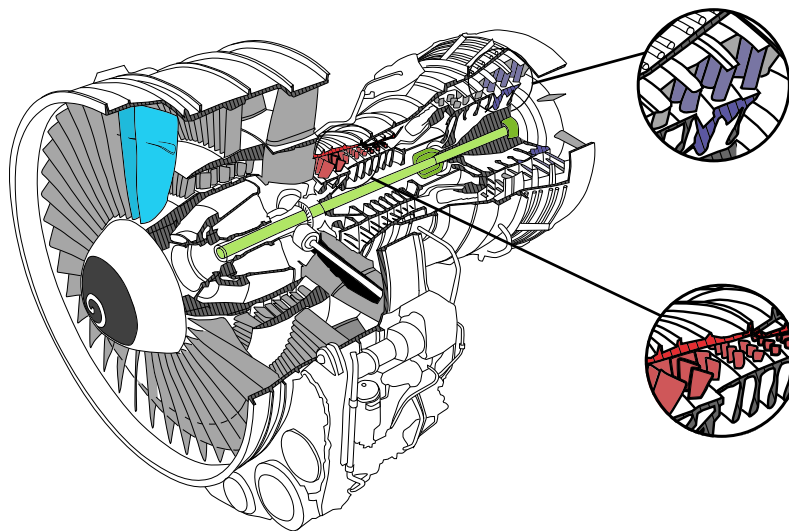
Main contact interfaces in aircraft engines: blade/blade (■), blade/casing (■), shaft/bearing (■) and blade/disk (■).
